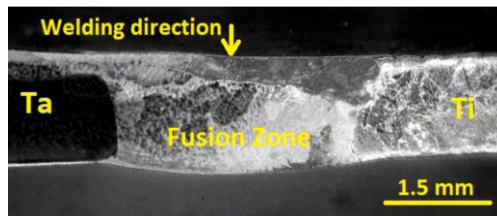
Cross-section of weld macro-structure of GTA weld of Ta and Ti with Ti filler.
